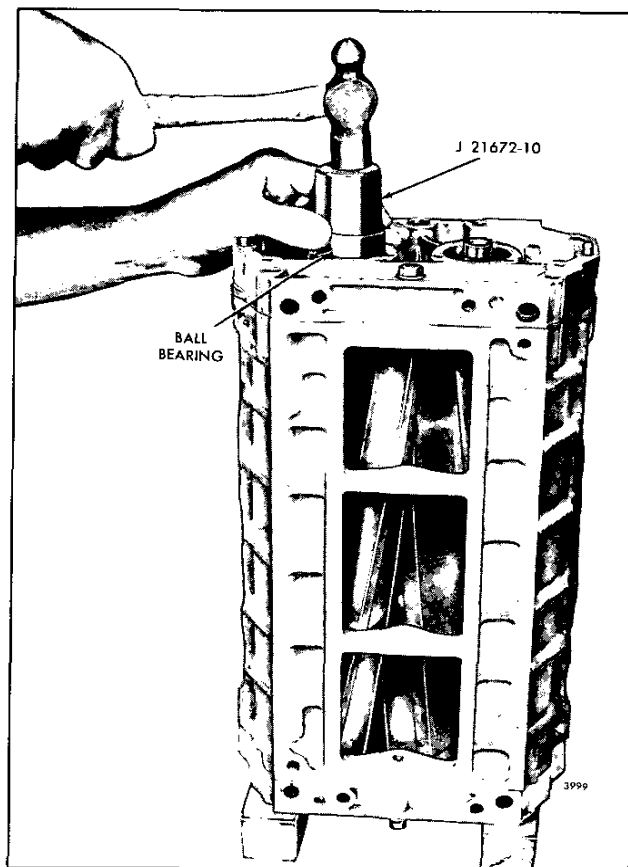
Installing Ball Bearings on Rotor Shafts and in Front End Plate (Former Blower)
